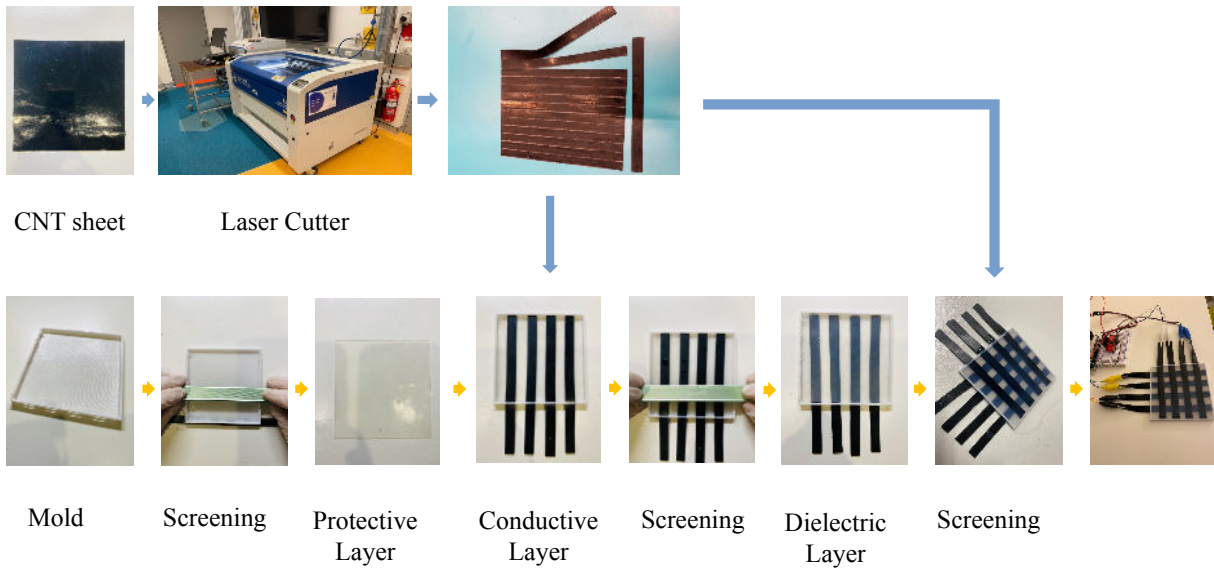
The fabrication of a soft sensor involves two pipelines: the upper one is for laser-cutting conductive layers and the lower one is for fabricating the multi-layer sensor.
